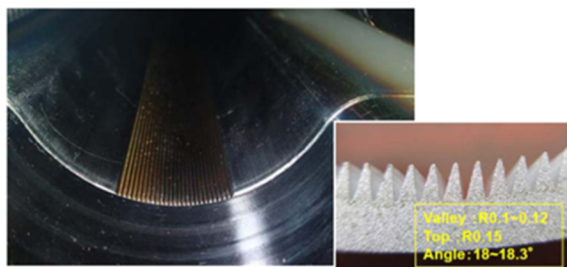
Inside view of a beam pipe with grooves for bending magnet, and the detailed structure.
